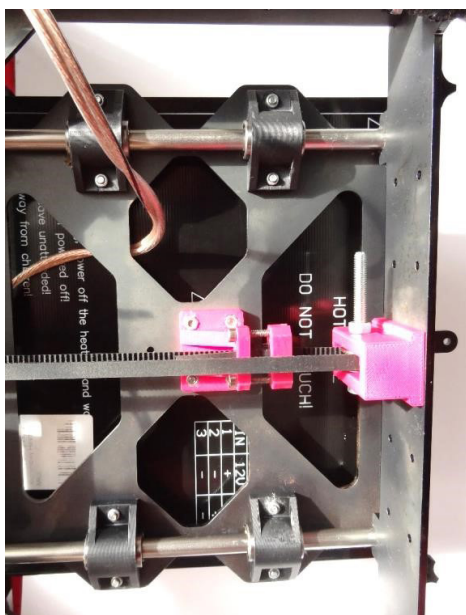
The assembled Y-axis, bearings mounting, tensioner mounting, toothed belt mounting, and the installed heating plate [own elaboration]
